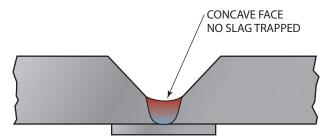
Flat or concave weld faces are easier to clean off
